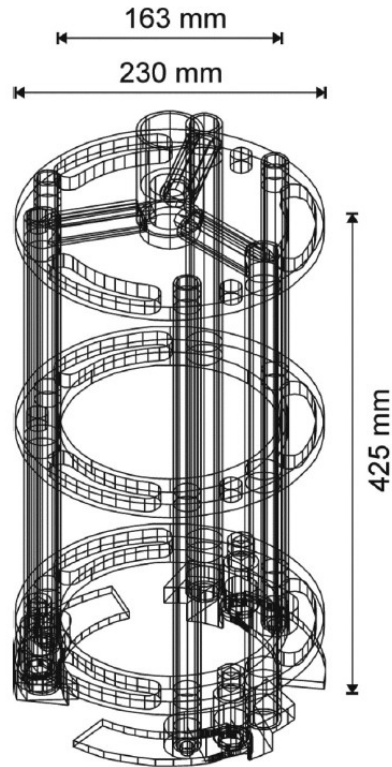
Technical drawing of the mini-block sampler (Emdal et al., 2016)
